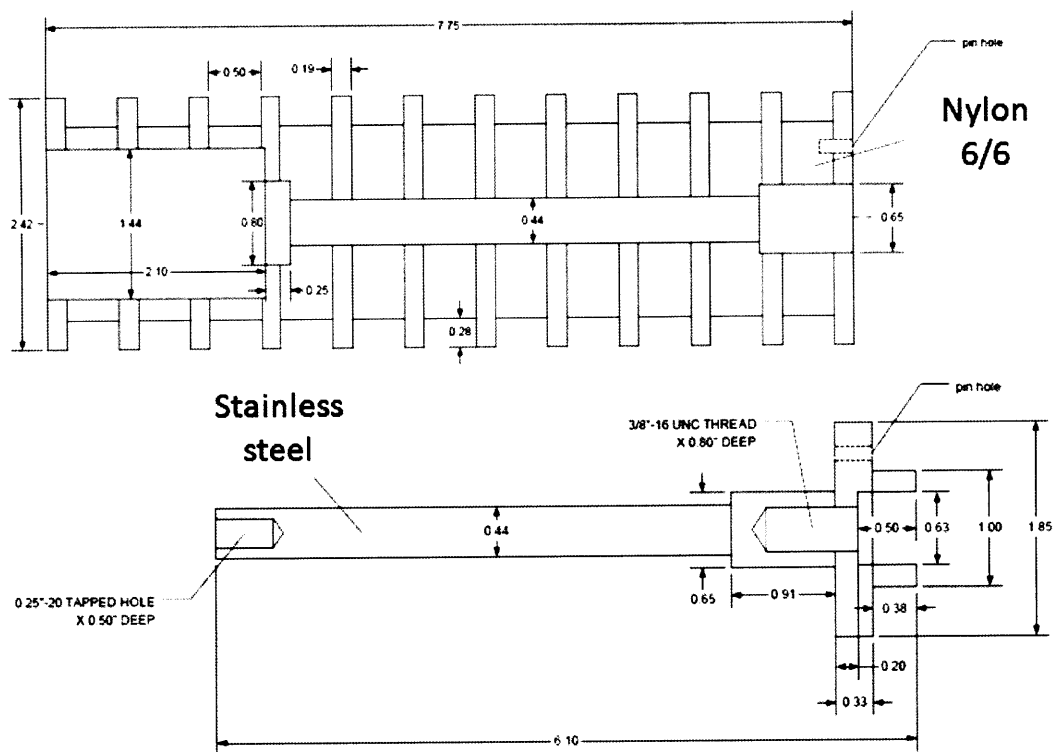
Schematic of the media milling impeller and coupling adapter for use in high-pressure encapsulation trials.
